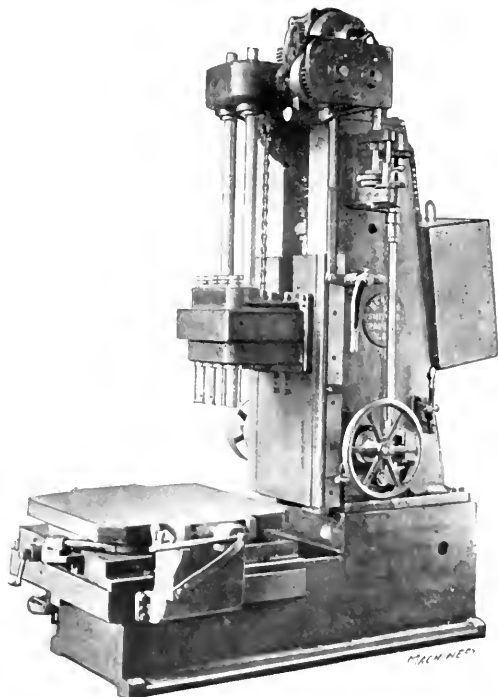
Side View of Gridley Automatic Multiple-spindle Drill
